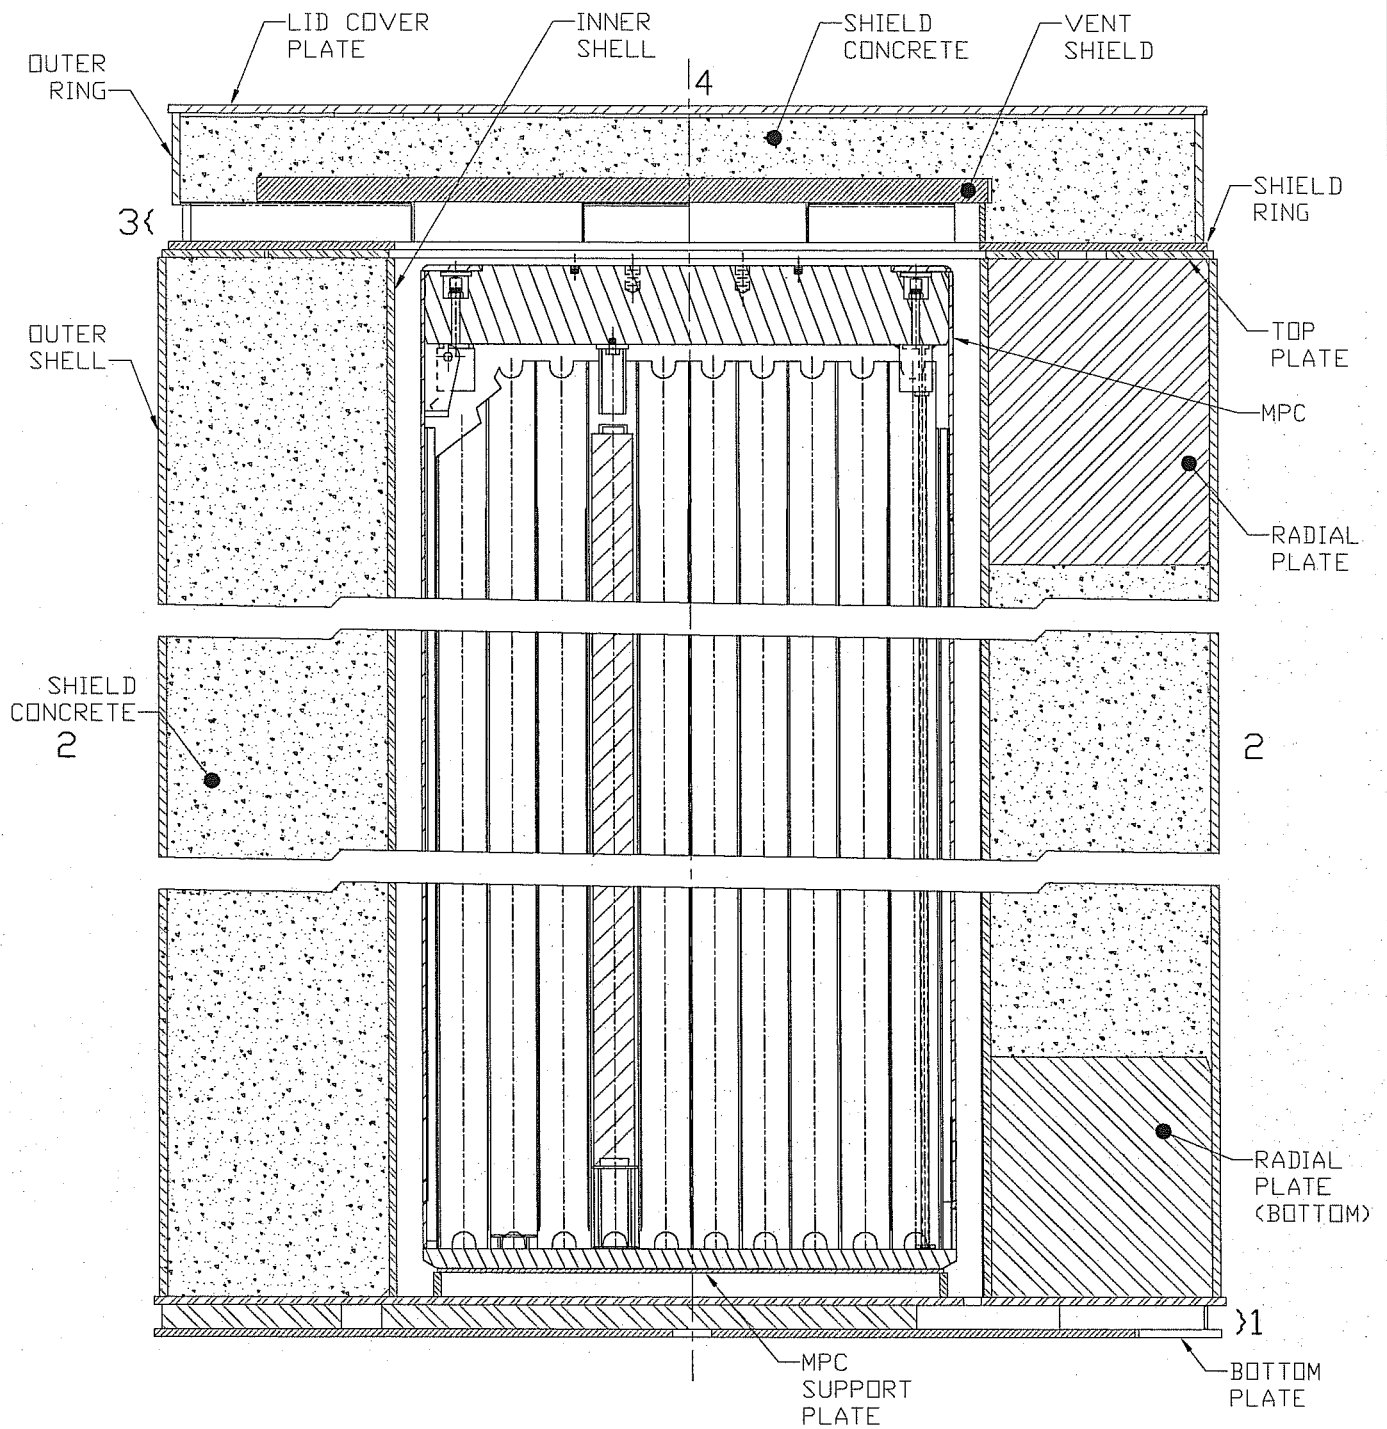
; HI-STORM 100S VERSION B OVERPACK CROSS SECTIONAL ELEVATION VIEW WITH DOSE POINT LOCATION
